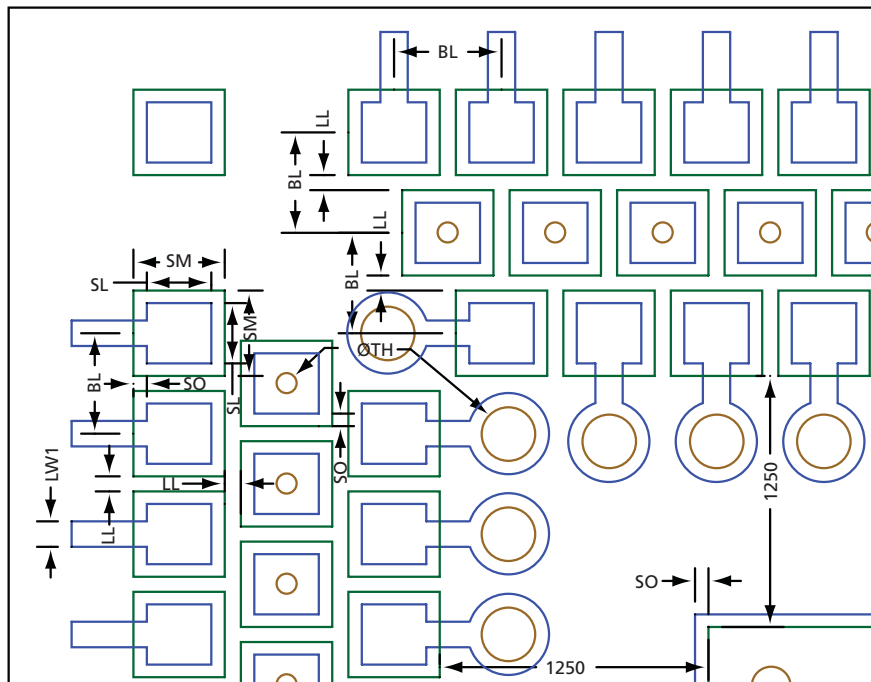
• Soldered Pads for QFN Packages, Reduced Thermal Pad (PCB top layer)
